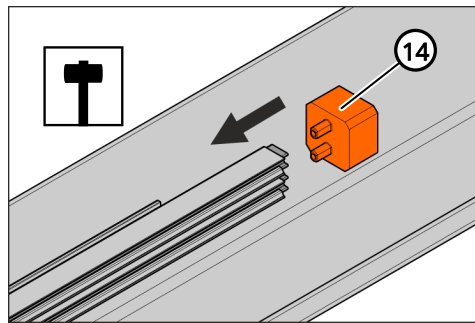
Tap the mounting cap with a hammer to connect the second end piece.
